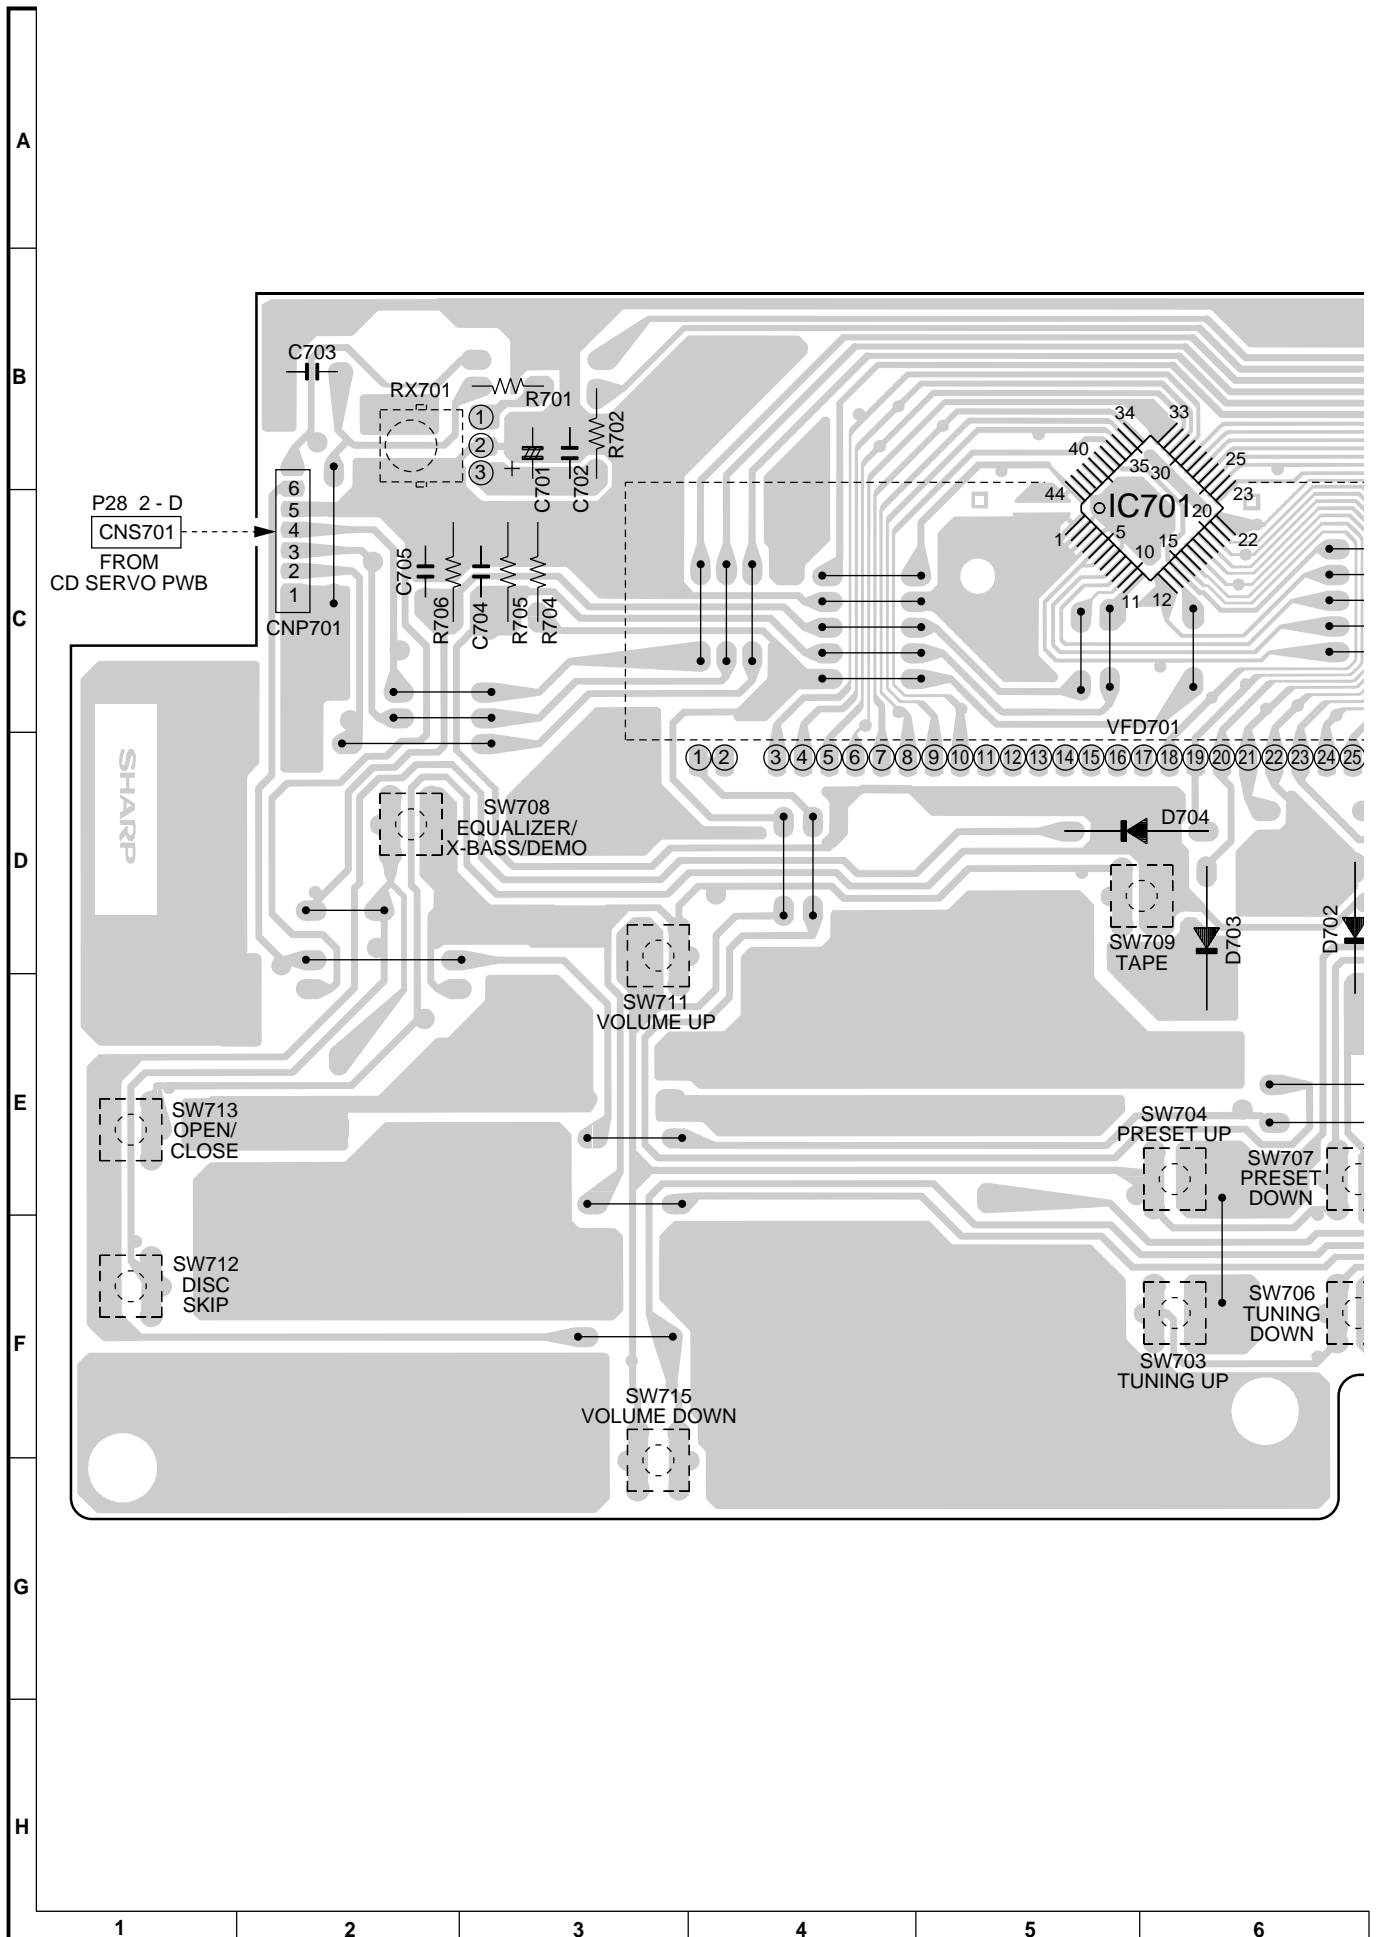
WIRING SIDE OF P.W.BOARD (5/7)
